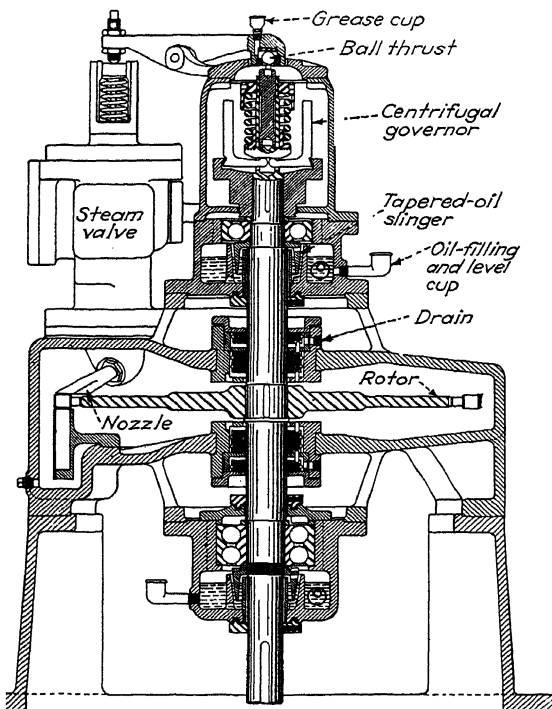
Vertical mechanical-drive turbine with ball bearings.
